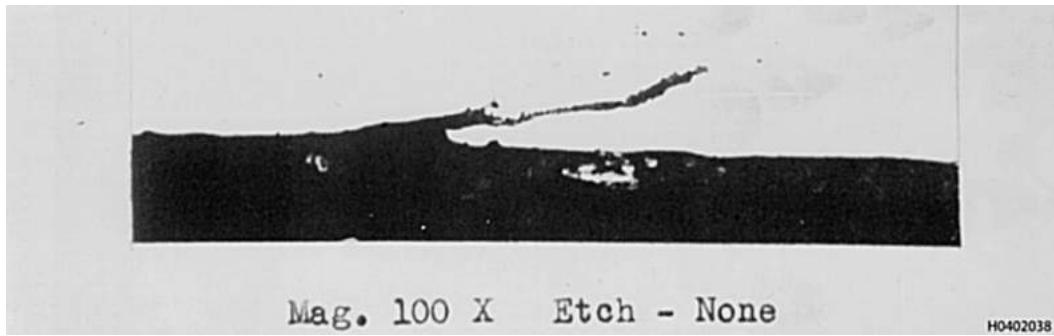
Cross Section of a Forging Lap (Magnified 100X)
